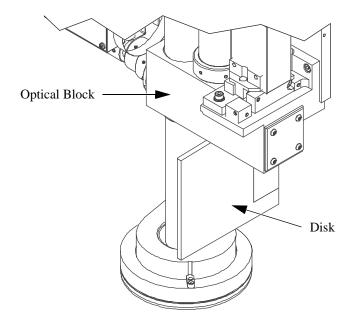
Inserting a Disk Between Optical Block and PRL
